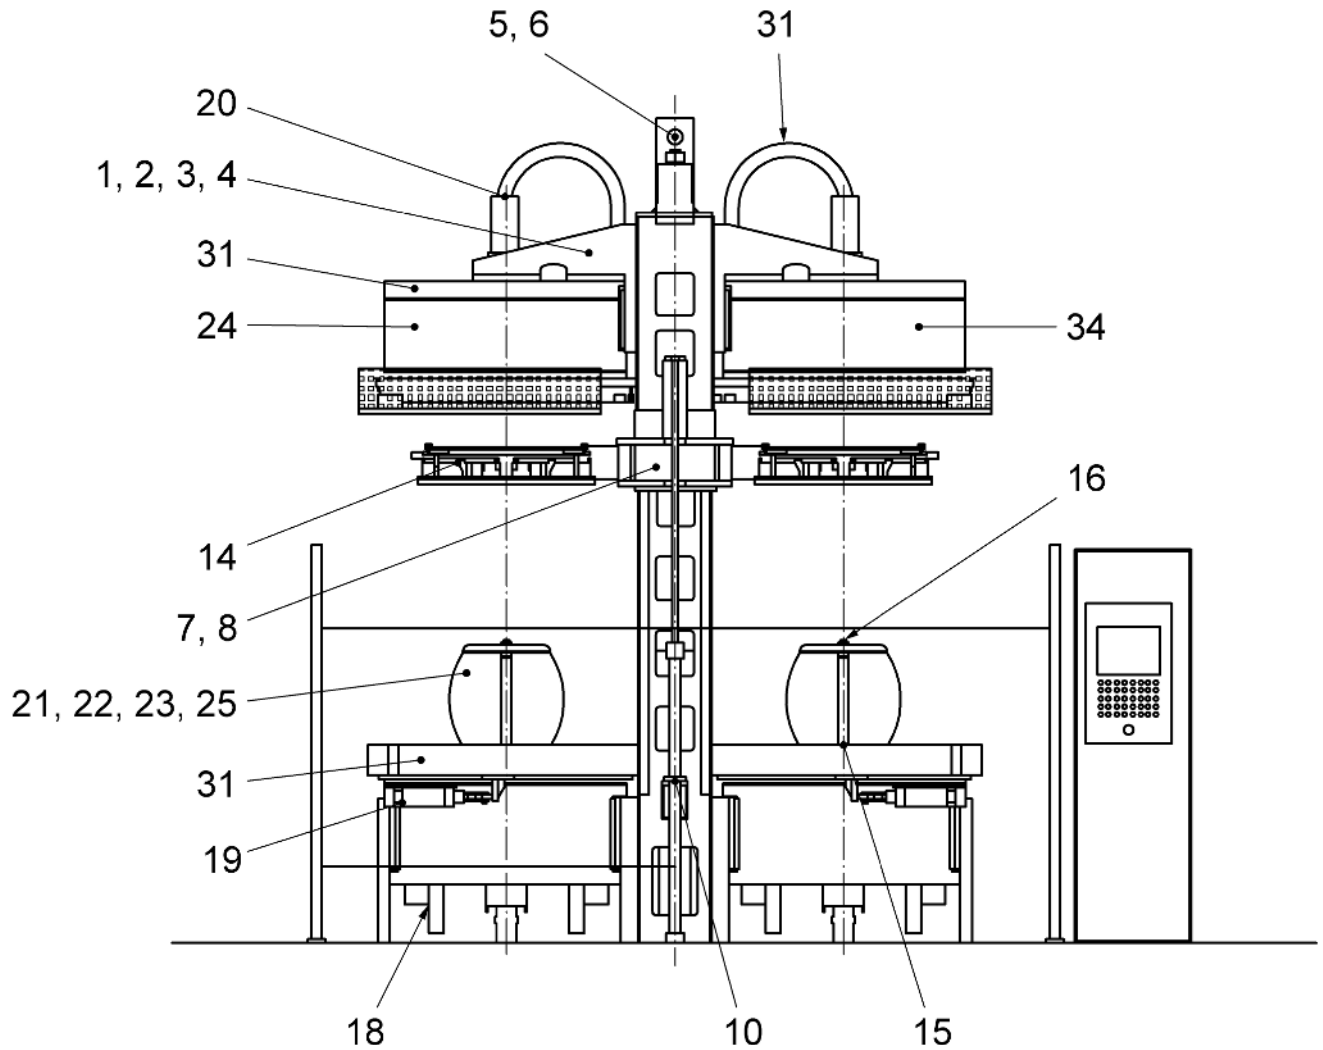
Location of hazards on crossing flow tyre curing machines (front view)
